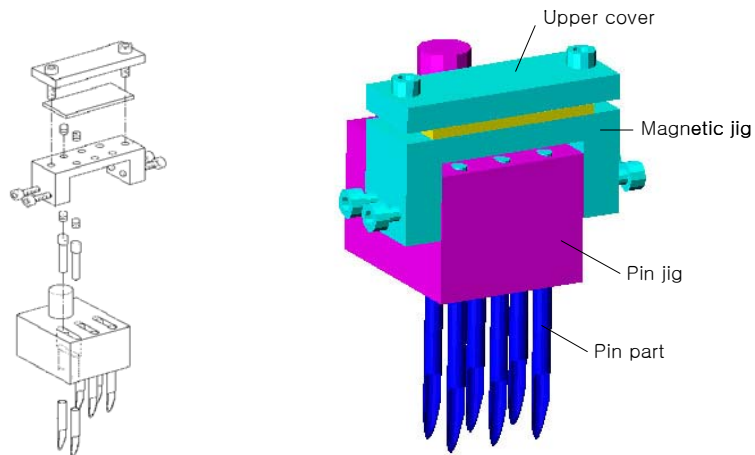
The assembly and the schematic diagram of assembling DNA spotting head.
